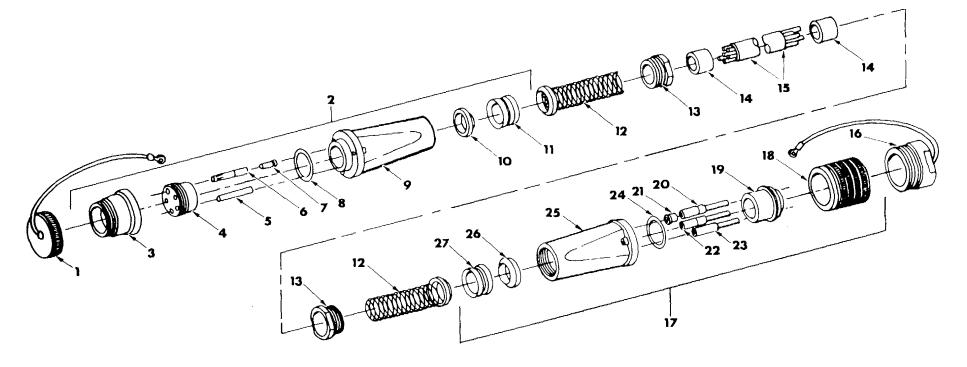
Cable assembly, power, electrical 72289-100; connector, plug, electrical MS90557C32412S, female; and connector, plug, electrical MS90556C32412P, male.
